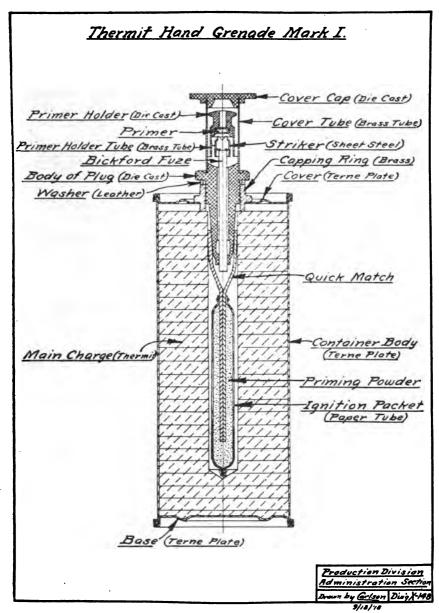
Sectional view of thermit hand grenade, Mark I.
